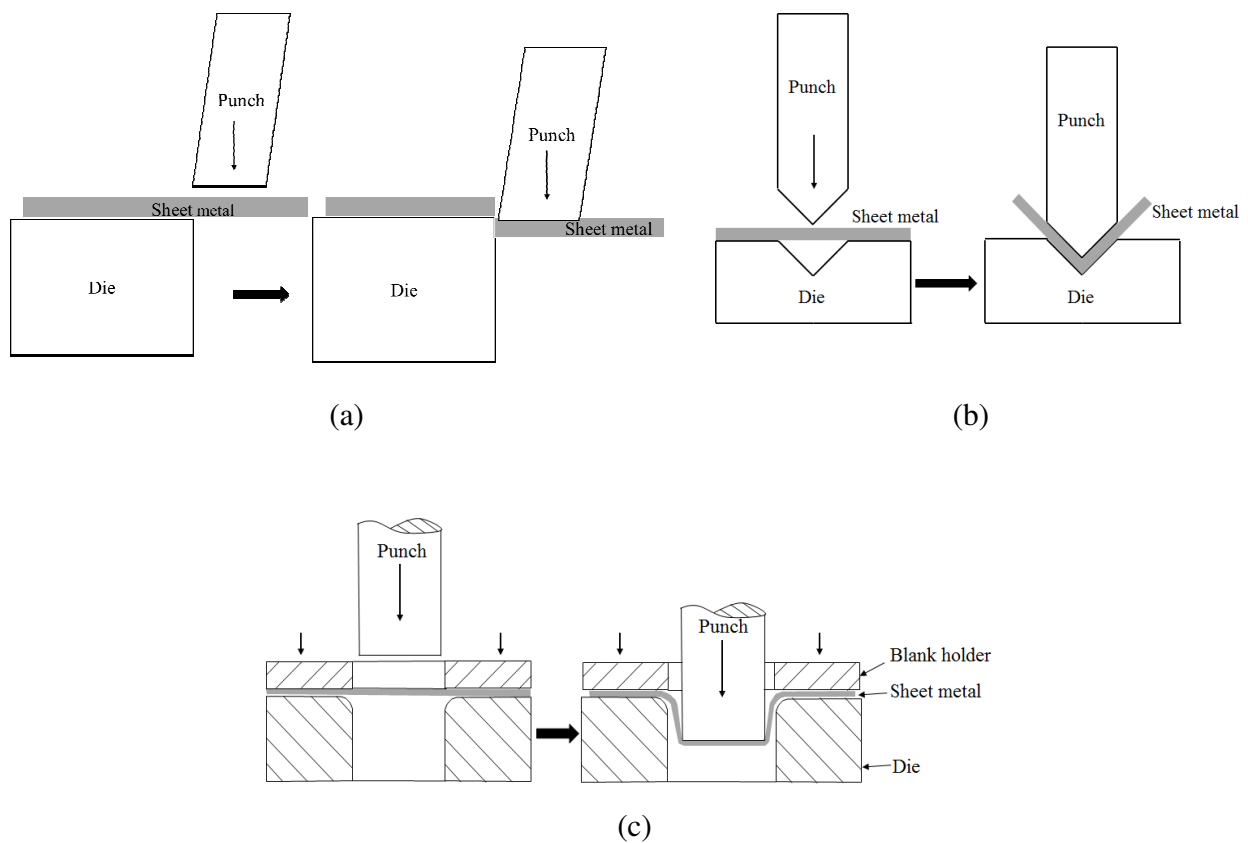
Illustration of various sheet metal forming operations: (a) Cutting, (b) bending and (c) deep drawing.
